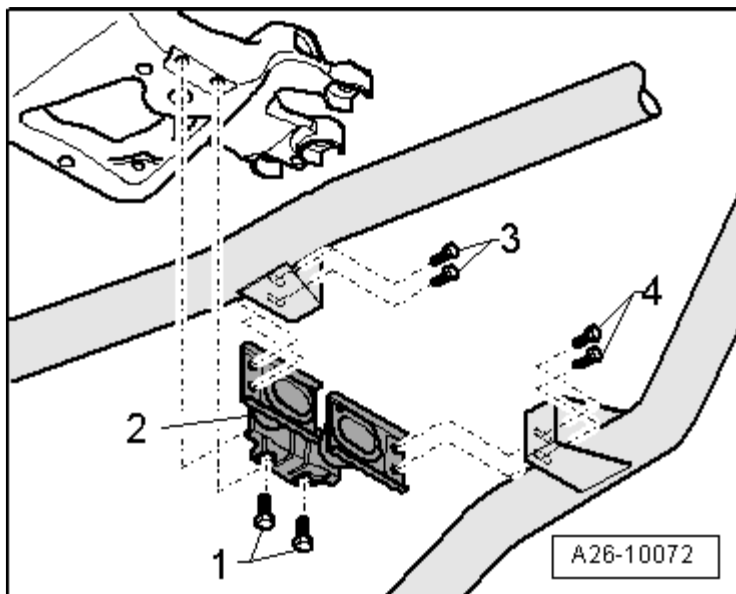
Individual Components Of Center Bracket Mounting For Front Exhaust Pipe
